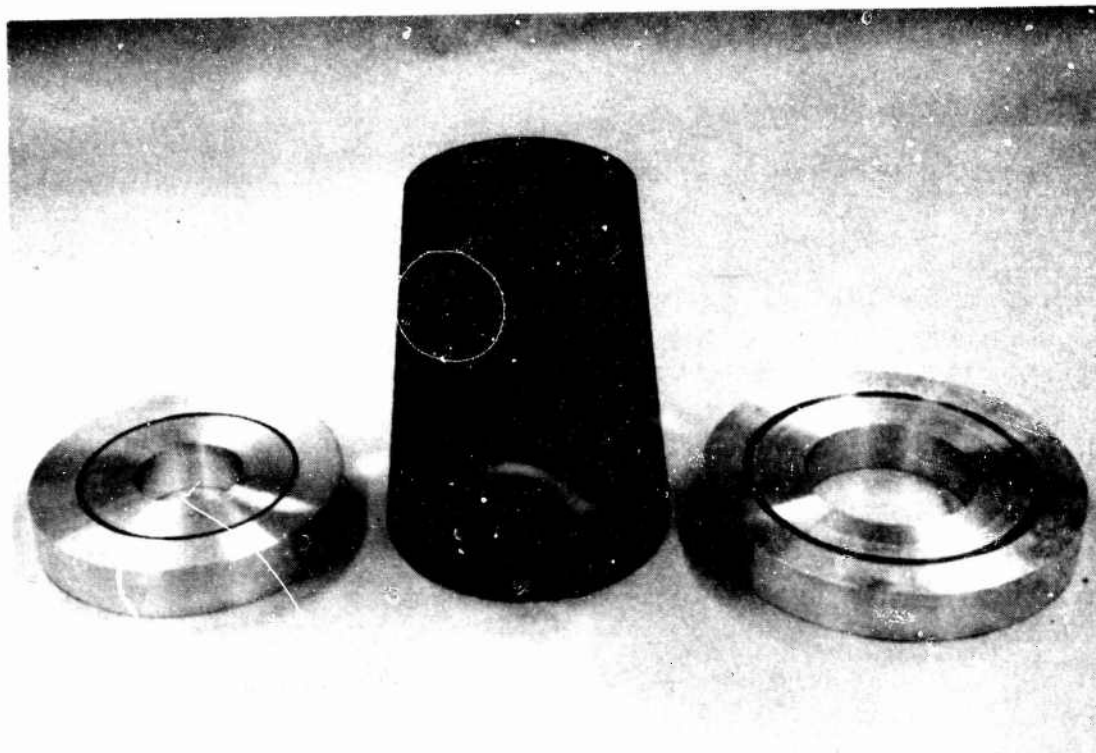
Trimmed Cone Frustum and Four Aluminum Rings
